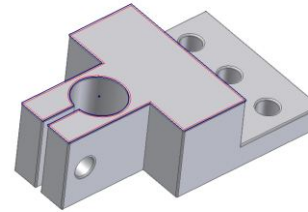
529-33334-600 - Clamp, P&F Camera
